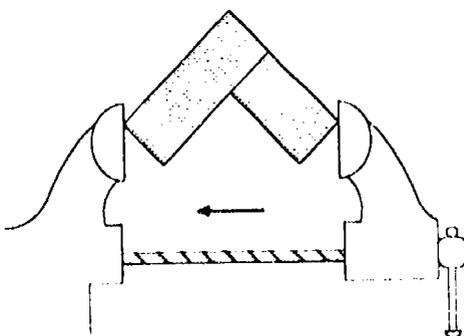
Test 3: if the boards are at right angles, place them in a vise as shown here.
